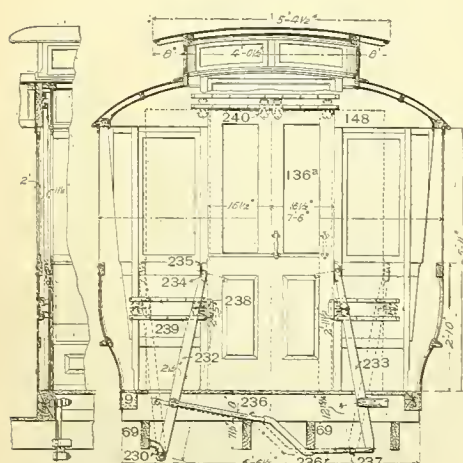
Sectional Views showing End Framing and Mechanism of Sliding Doors.
